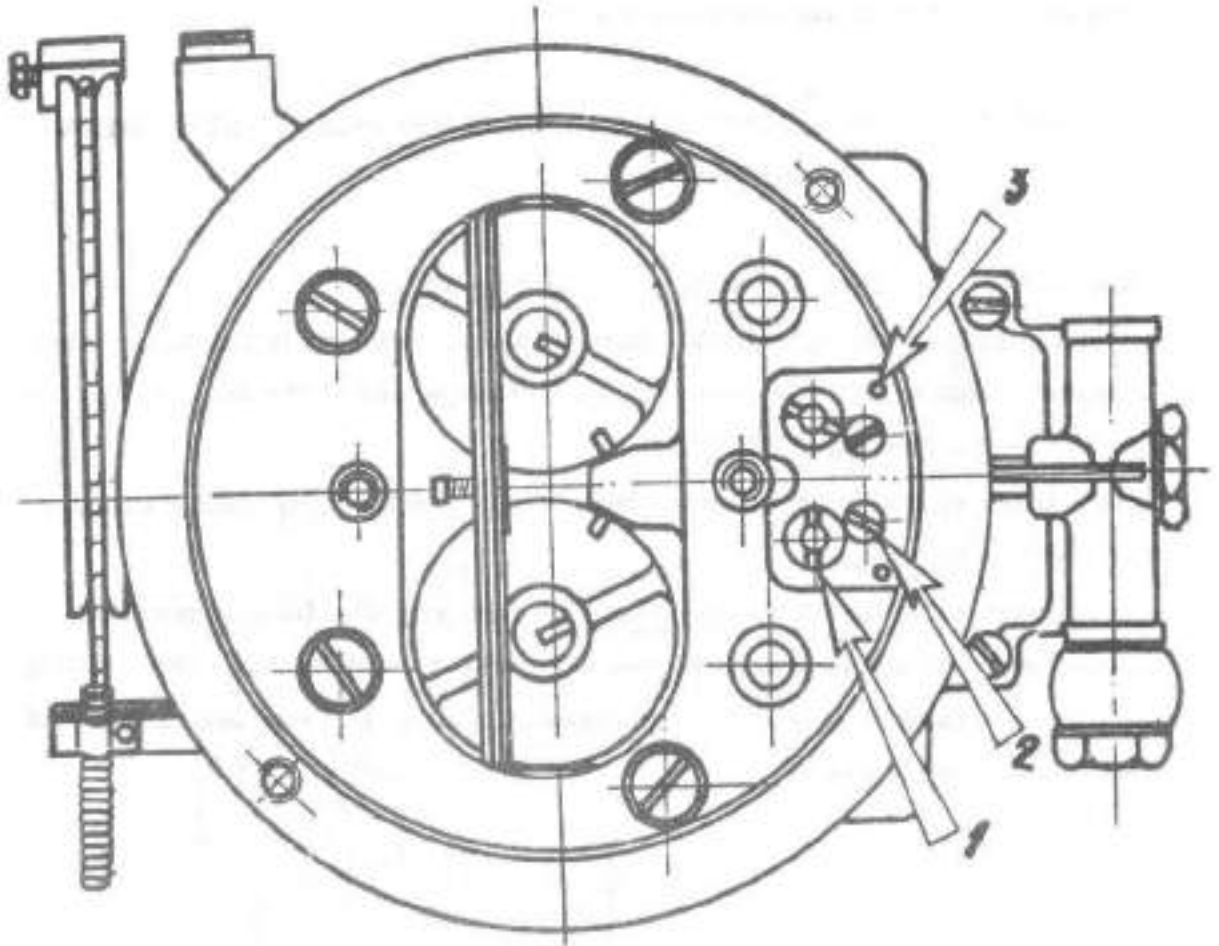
ACCESS TO CARBURETTOR JETS
